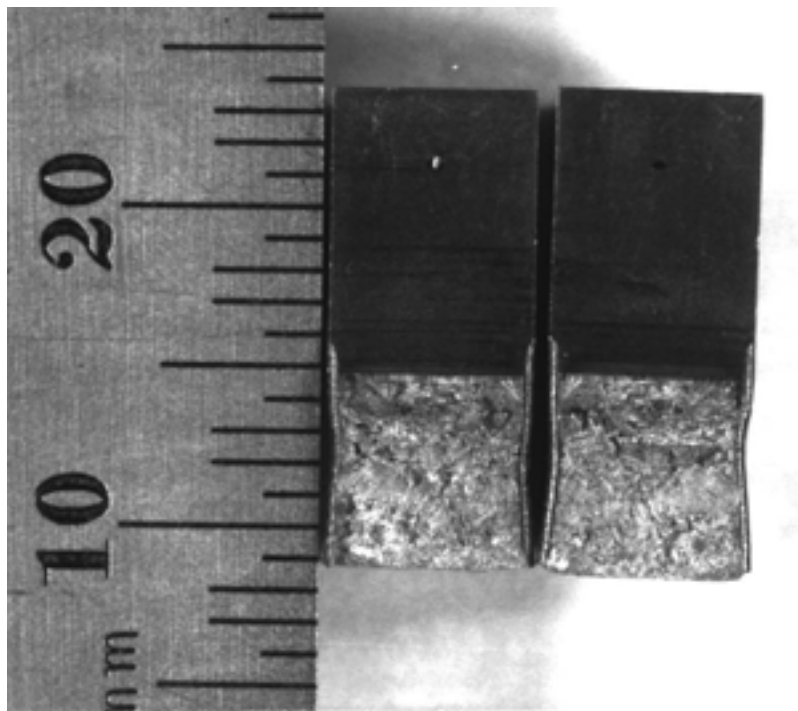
Fracture surface of specimen Y4-03 tested at 288°C
